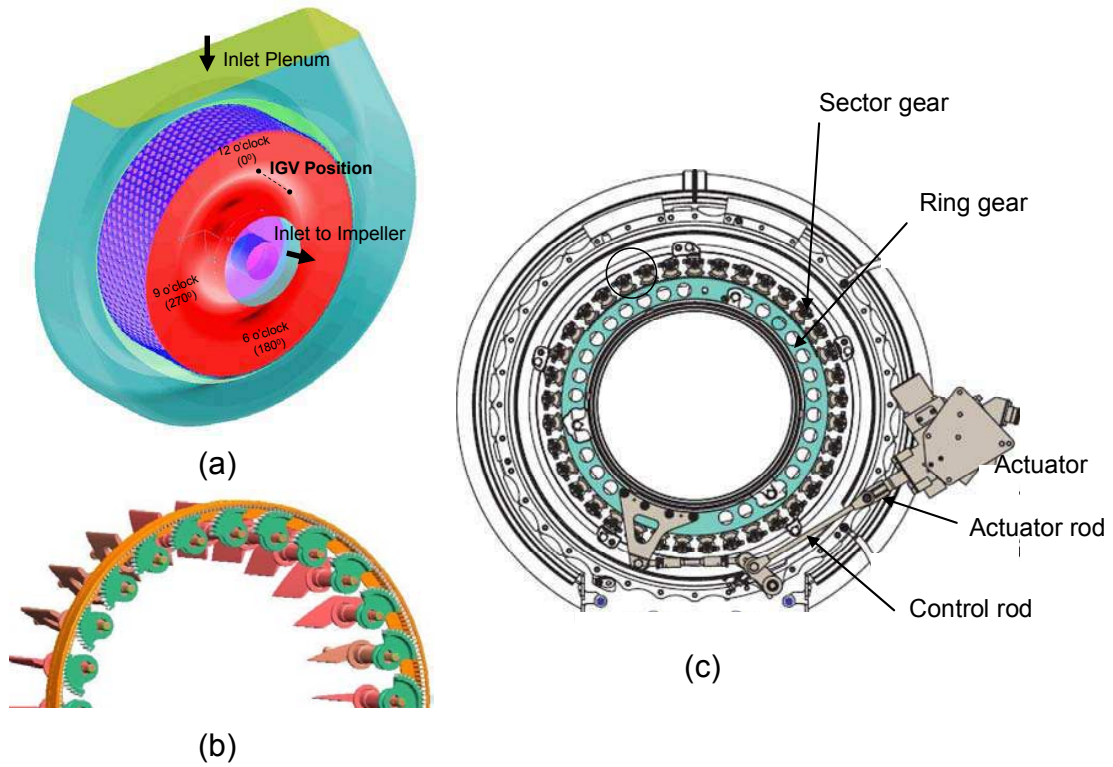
IGV plenum (a) with its gear-system (b) and assembly (c) from Duong [28]
